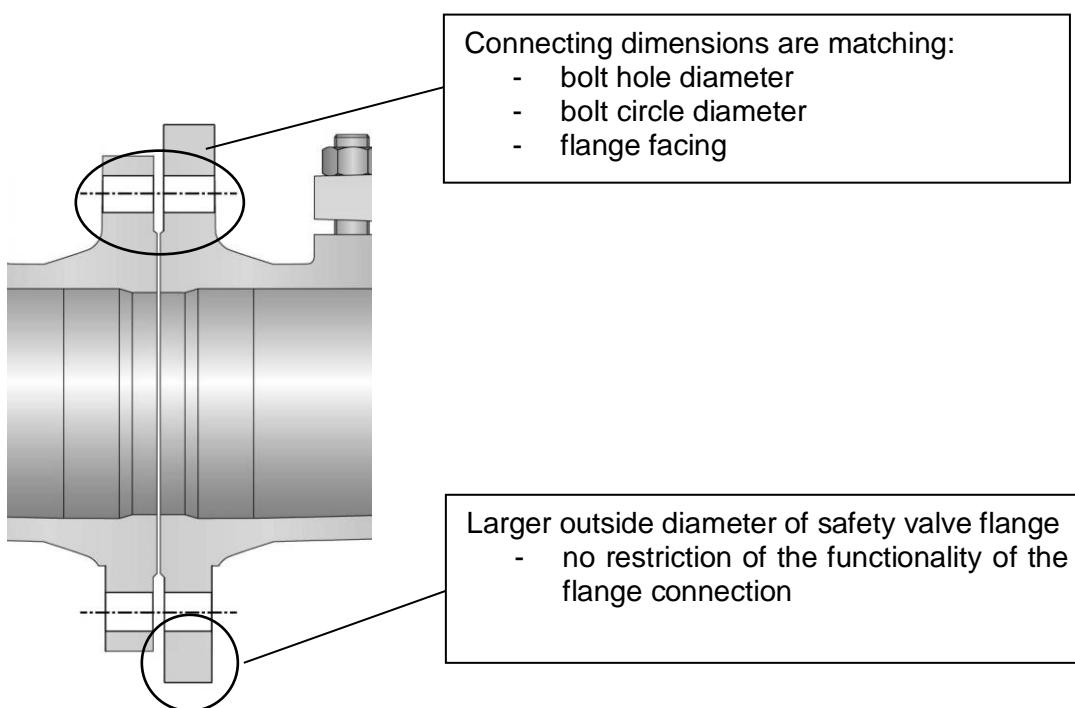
Illustration safety valve flange and pipe flange
